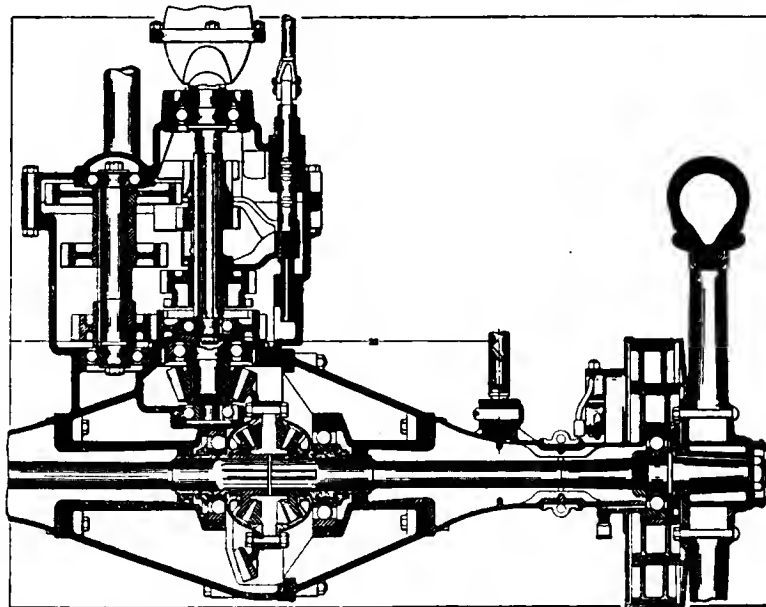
Live rear axle with attached transmission, sectioned to show annular ball bearings, floating shafts, double brake drum and general details
